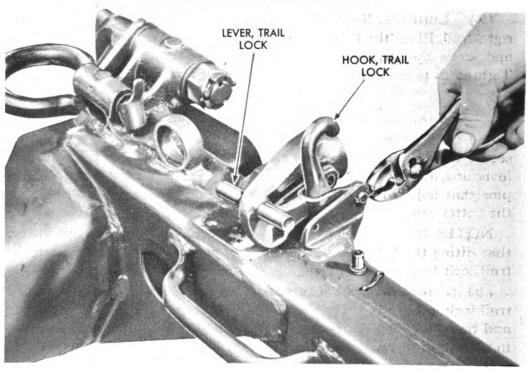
Removing the Trail Lock Lever Latch Guide and Allied Parts
